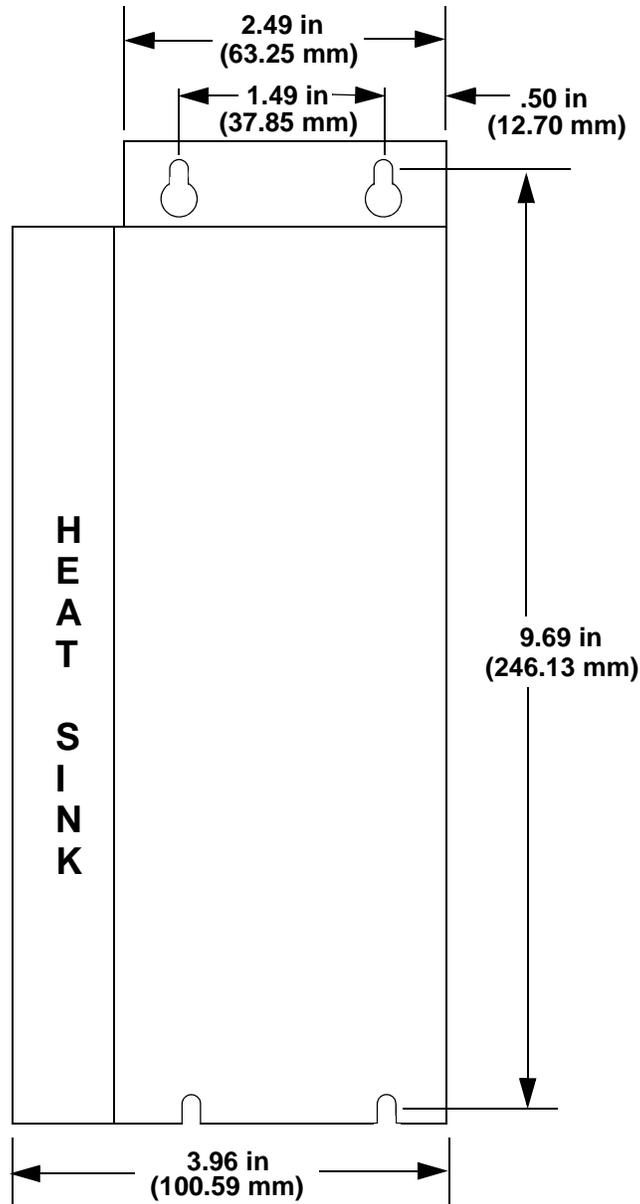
1 kW & 2 kW Standard Drive (non-DN) - Front View
